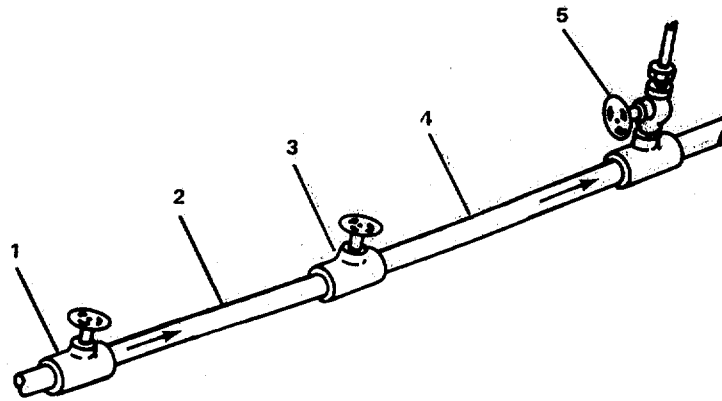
Repair Welded Valves (Typical).
